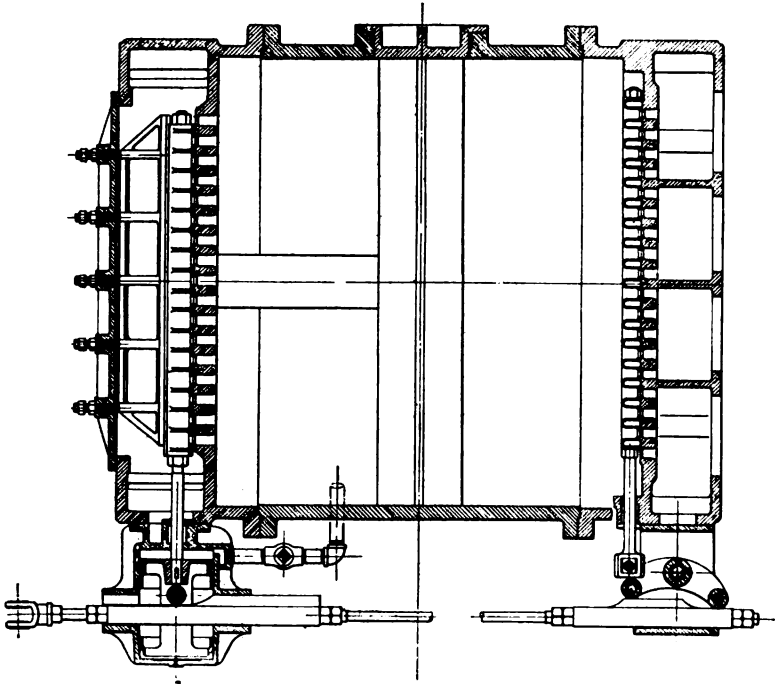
SECTION THROUGH THE SOUTHWARK VALVE GEAR
